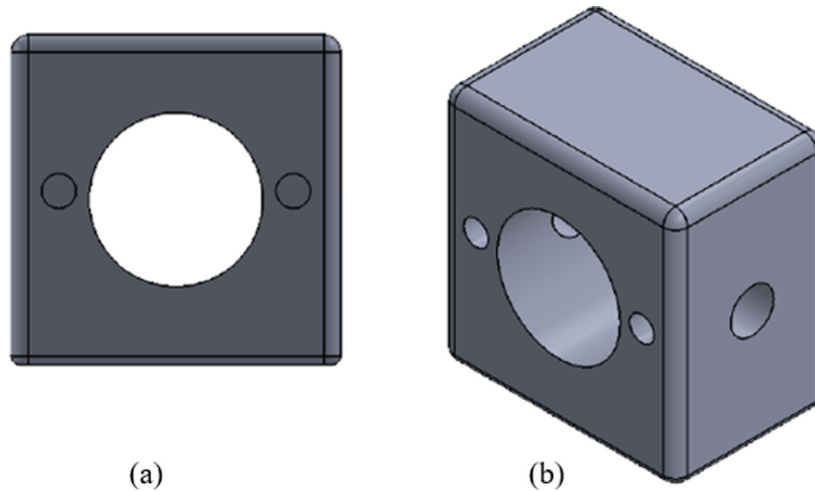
Bearing. (a) Front view, (b) Isometric view.
